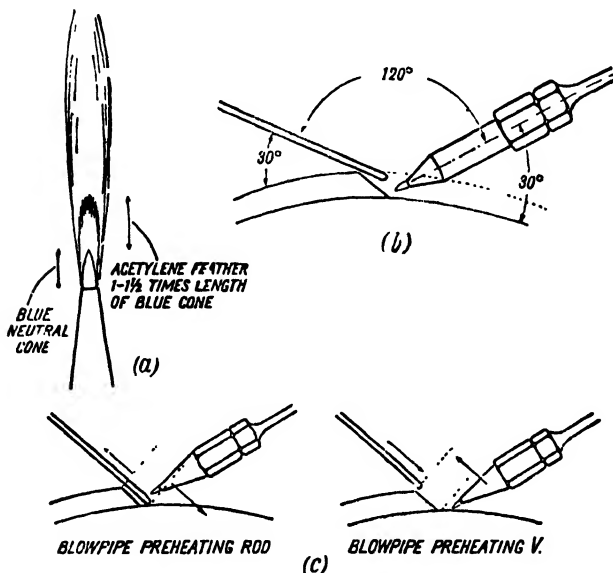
(c) Motion of blowpipe and rod in Lindewelding
